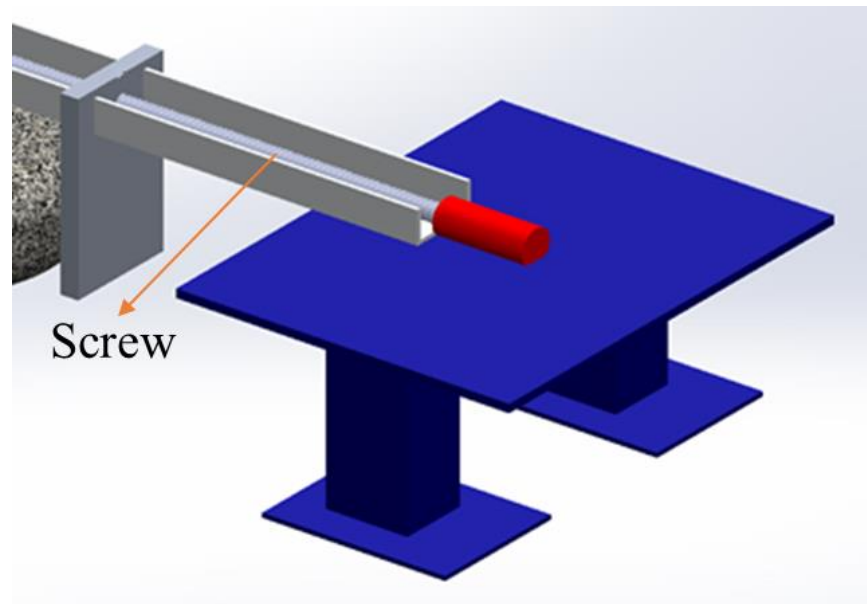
Ball screw mechanism. The motor rotates the screw. The part that pushes the curling stone has a threaded hole. The screw rotates inside that threaded hole and moves that part. The Red cylinder is the main actuator / motor.
